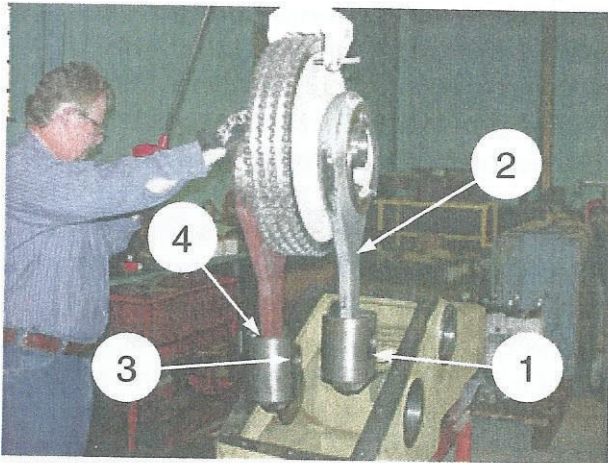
The crossheads [1] are retained to the connecting rods [2] by a set screw into the shaft [3]. These set screws do not appear in the photograph but are visible from a point [4].
